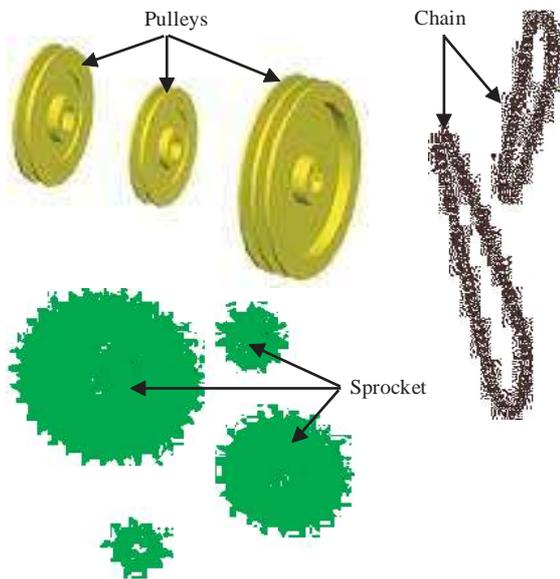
AutoCAD drawing of pulleys, chain and sprocket.
